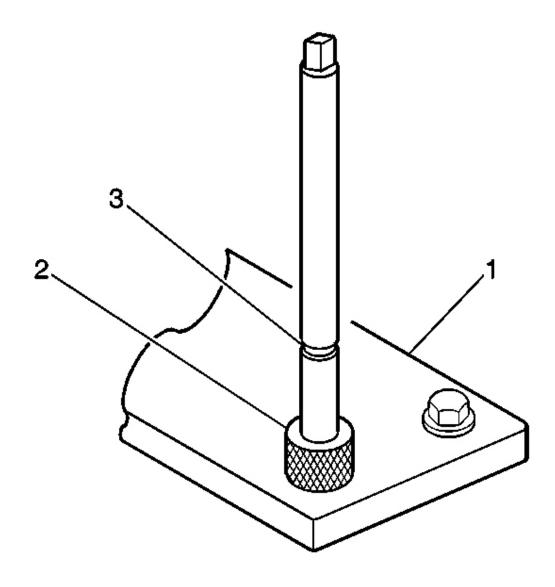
View Of Fixture Plate, Drill Bushing & Tool Marking Courtesy of GENERAL MOTORS CORP.
